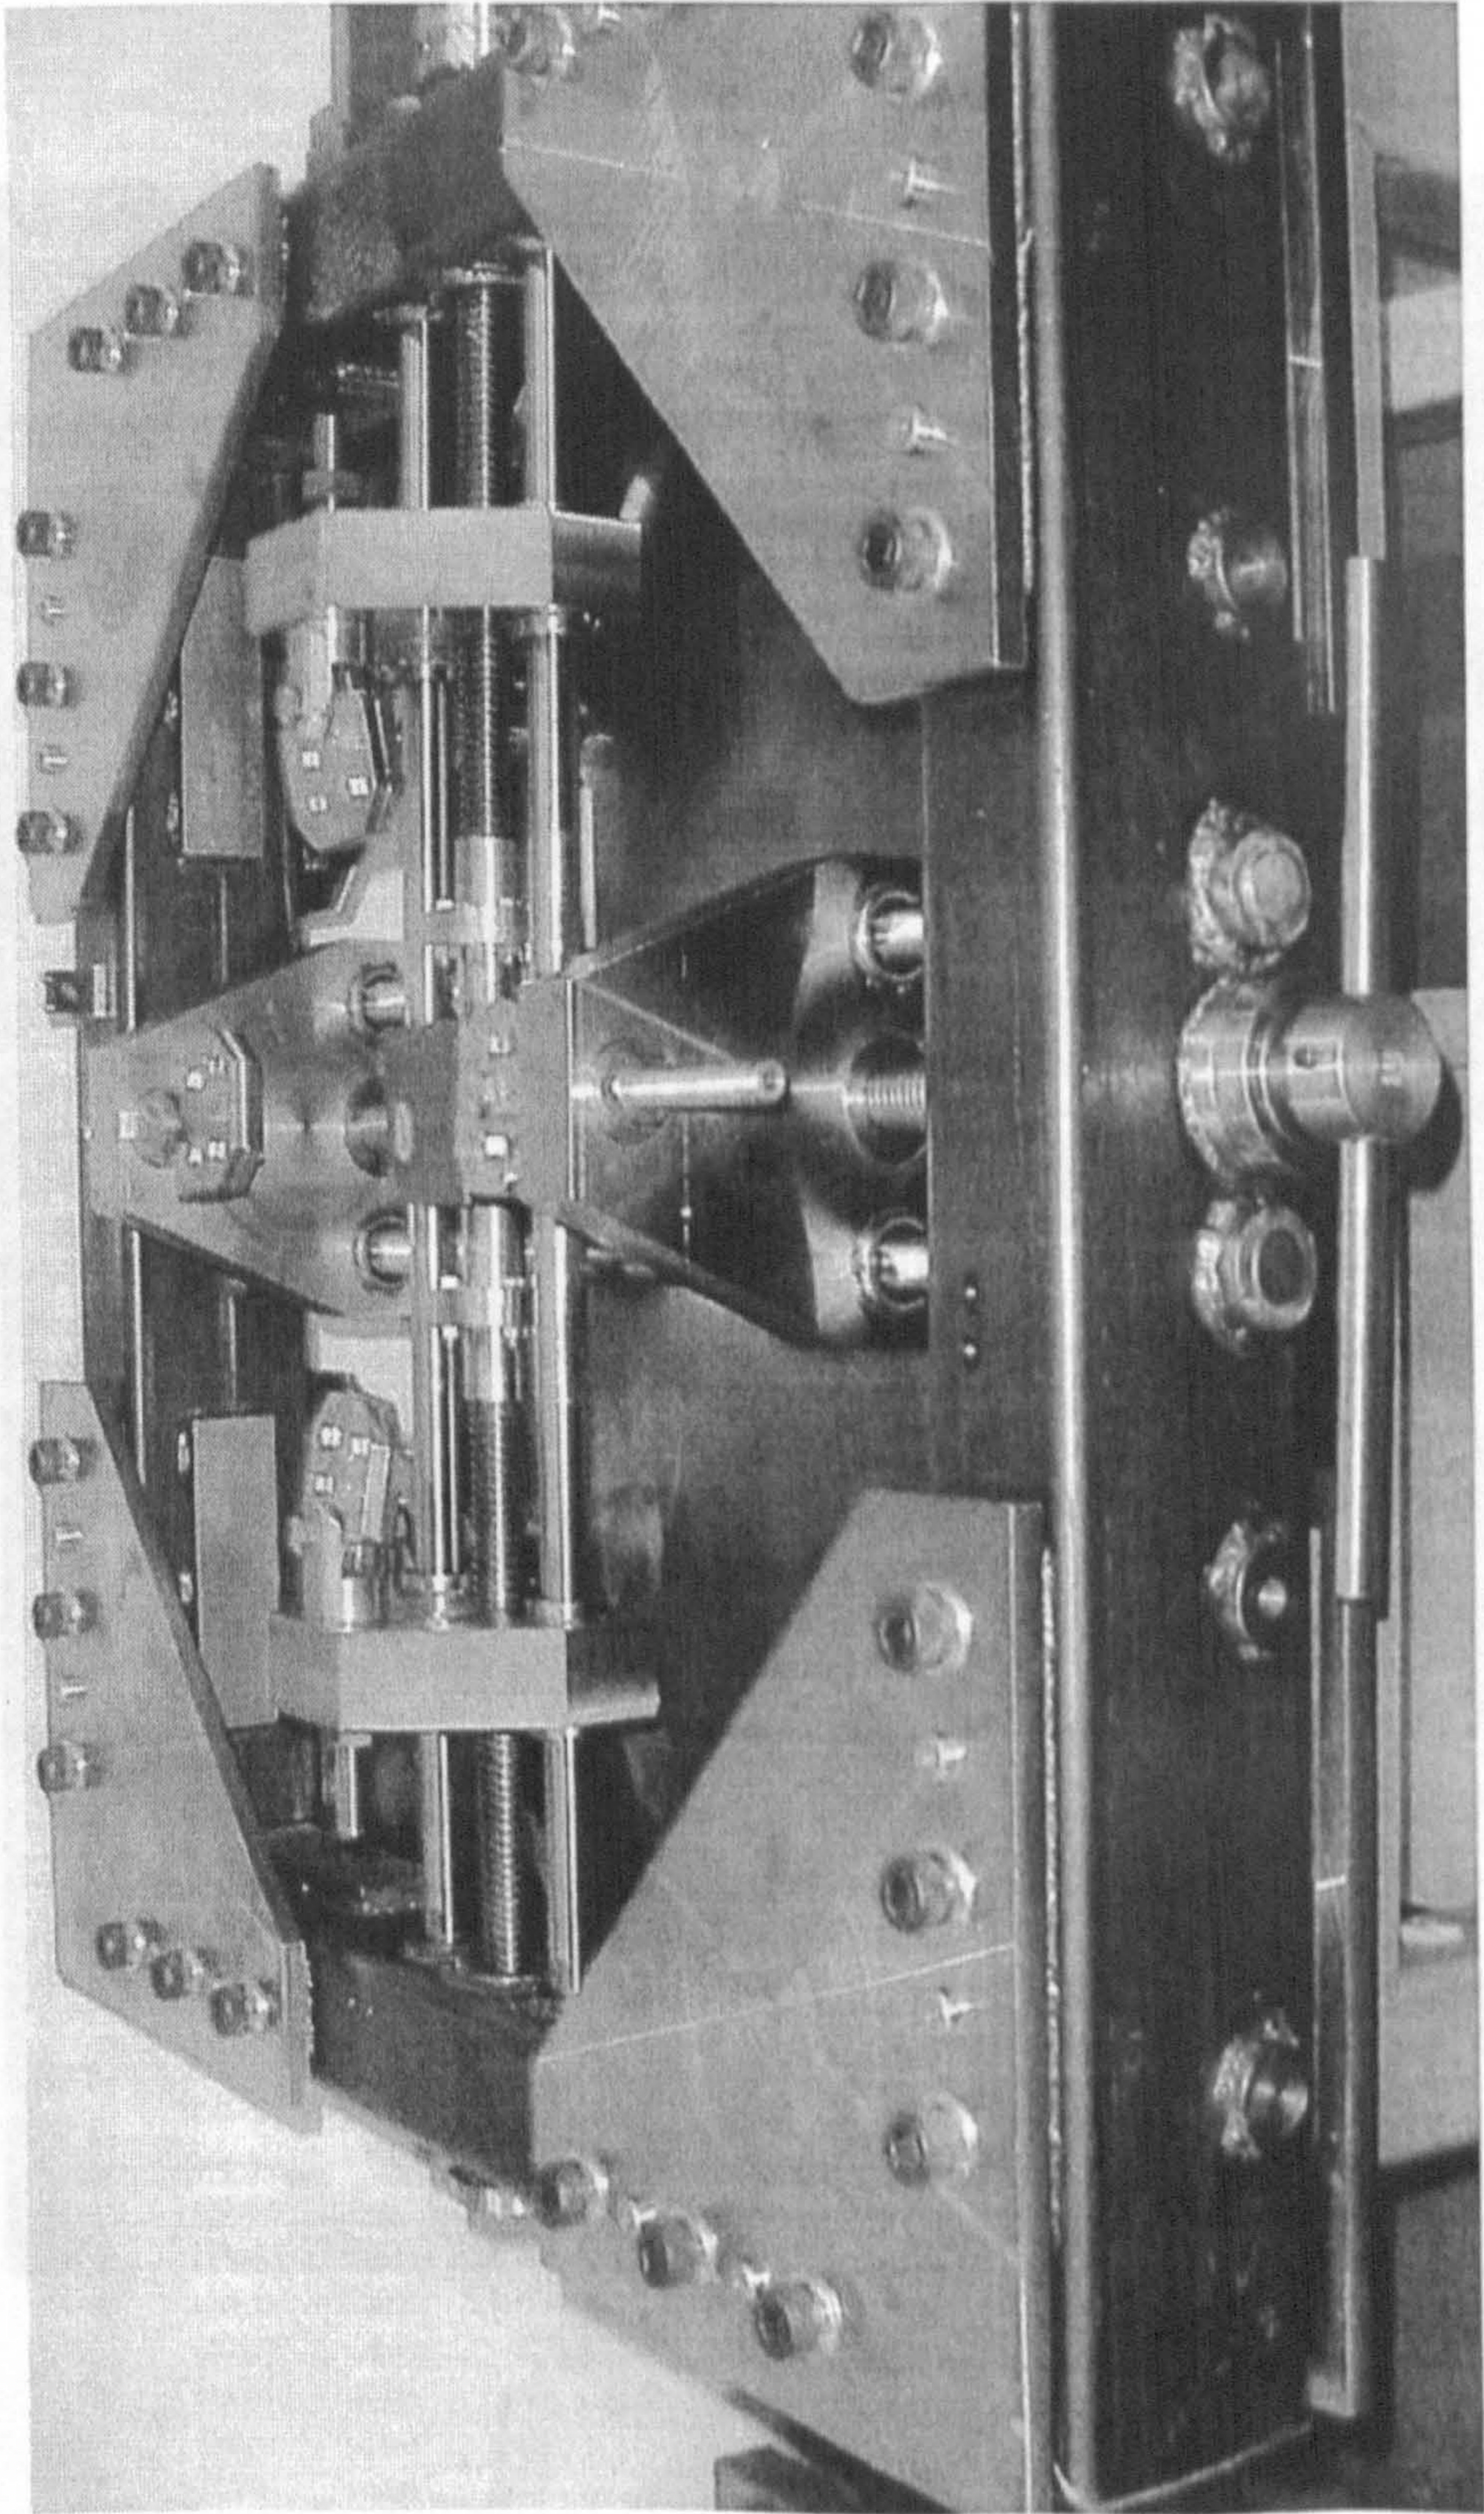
The most of the components were assembled in its (the machine's) working table
